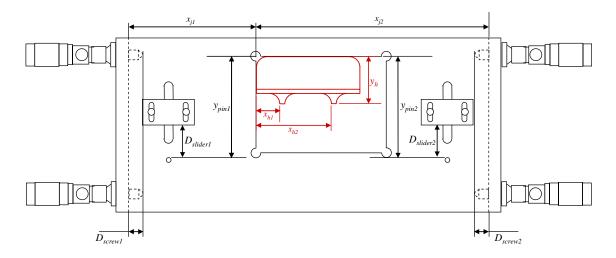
Schematic of ear with bonding jig with critical reference dimensions
